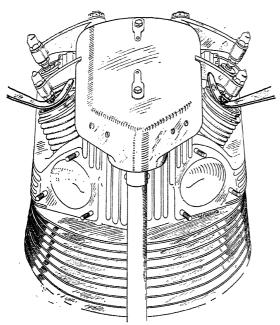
When setting valve clearances two sets of feeler gauges should be used simultaneously. Insert feeler between valve stem button and adjusting screw button and leave in position until adjusting screw has been tightened.
